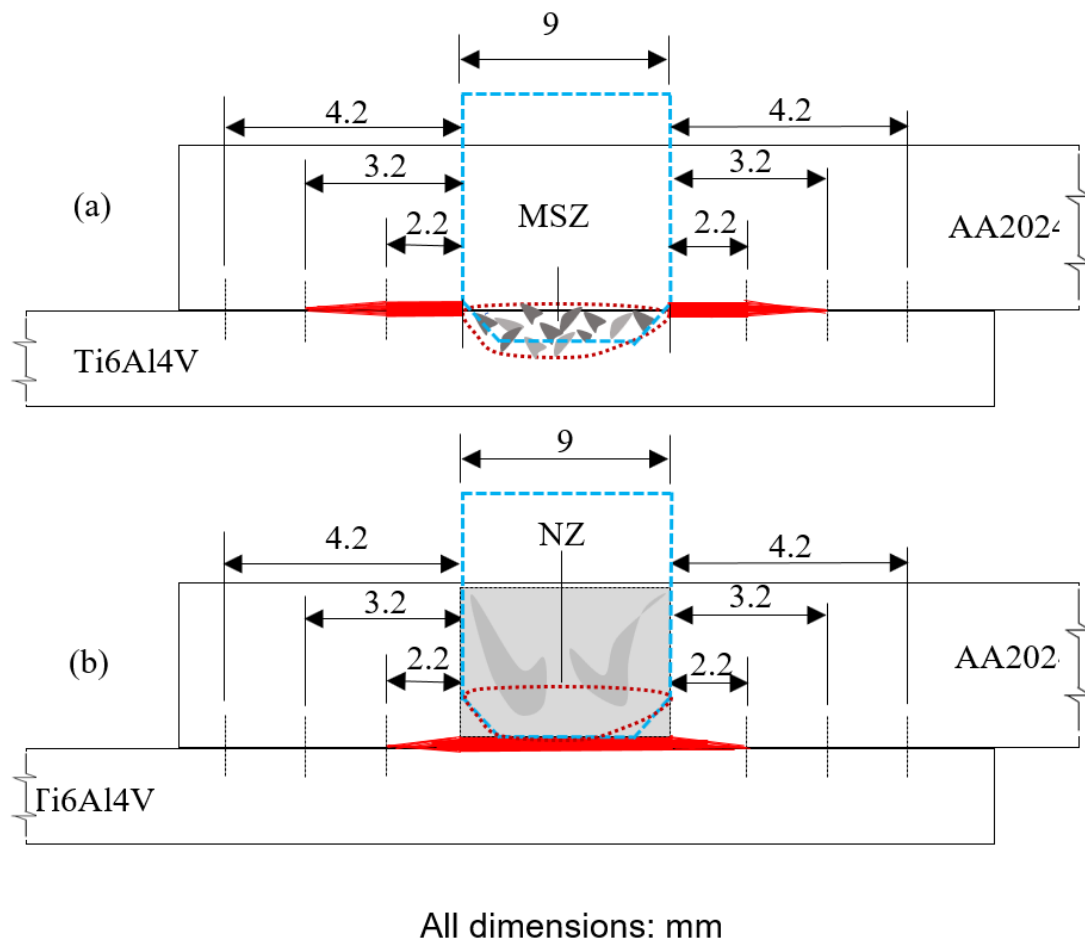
Schematic illustration of P and NP welds: (a) intermetallic growth outside of pin width for a penetrated weld sample, (b) NP weld sample with weld continuity consistent.
